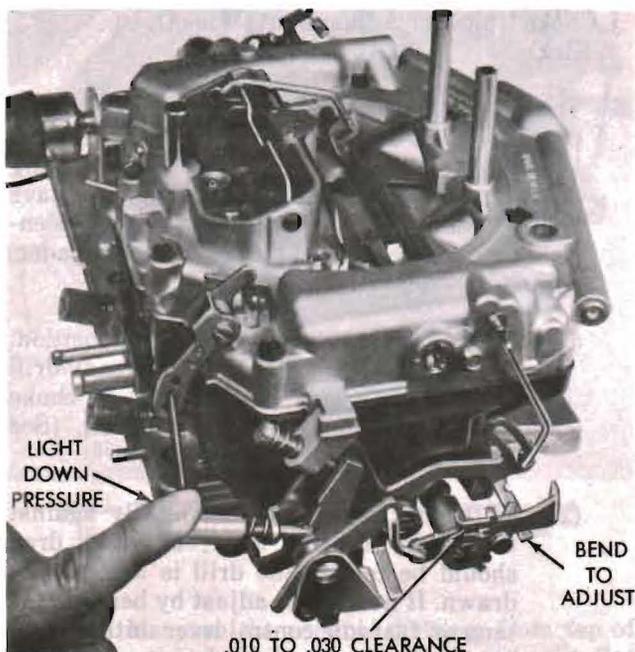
Adjusting Secondary Throttle Lock-in—Slide 1194
